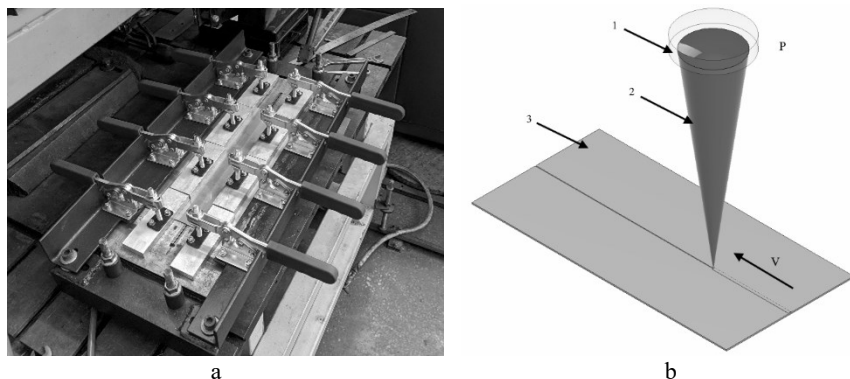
a - Clamping conductor for laser welding, b - welding scheme utilizing the clamping conductor, where 1 – lens, 2 – laser beam, and 3 – welded part.
